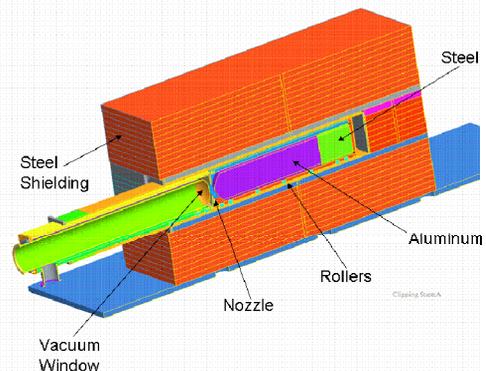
Cross sectional view of the new off-momentum beam stop and vacuum assembly.
